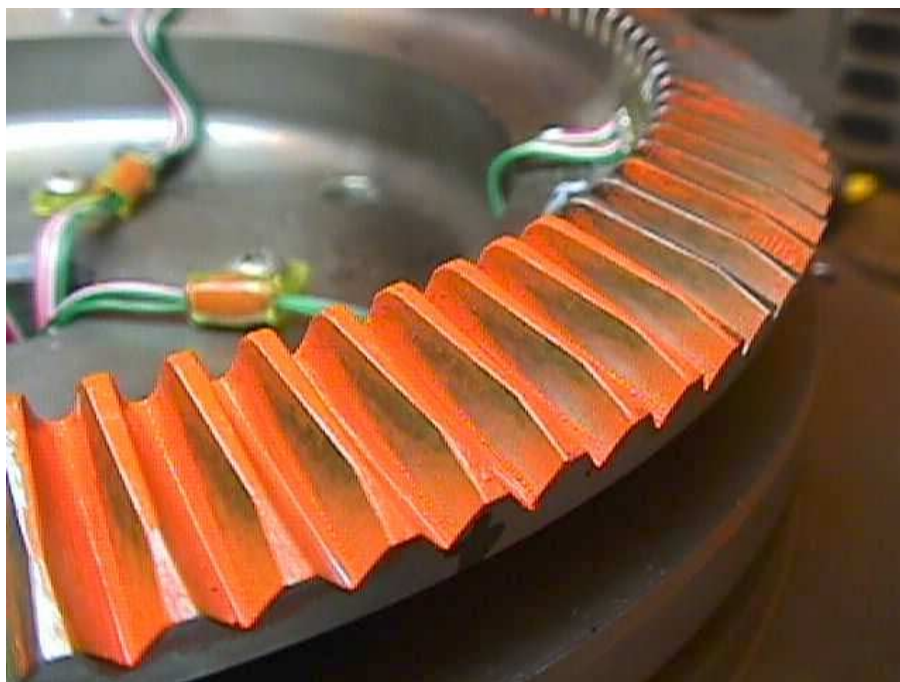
Upper Face Gear Low Load Contact Patterns with Idler 4
